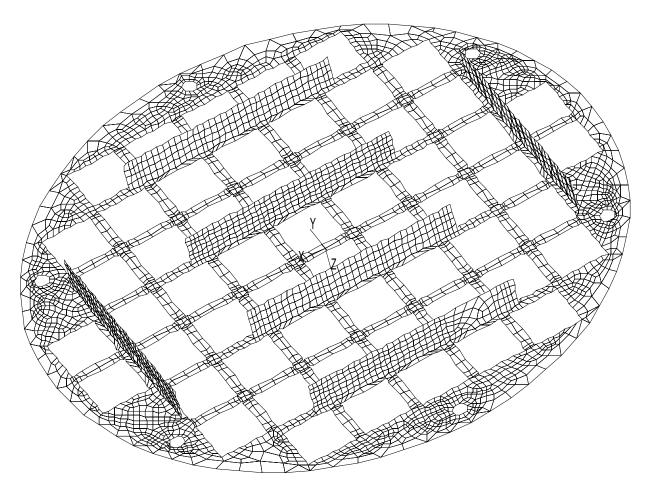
BWR Bottom Weldment Plate Finite Element Model
